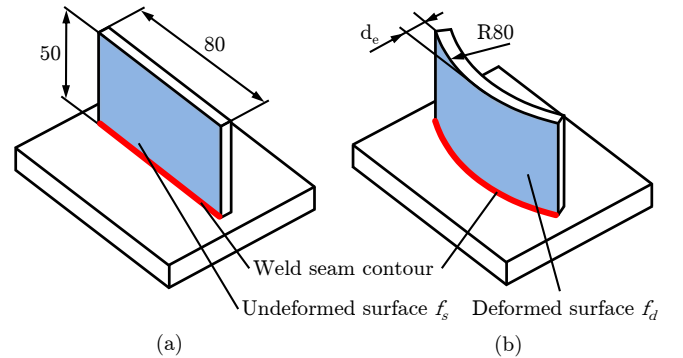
Geometry of welding workpiece (a) without deformation and (b) with deformation
